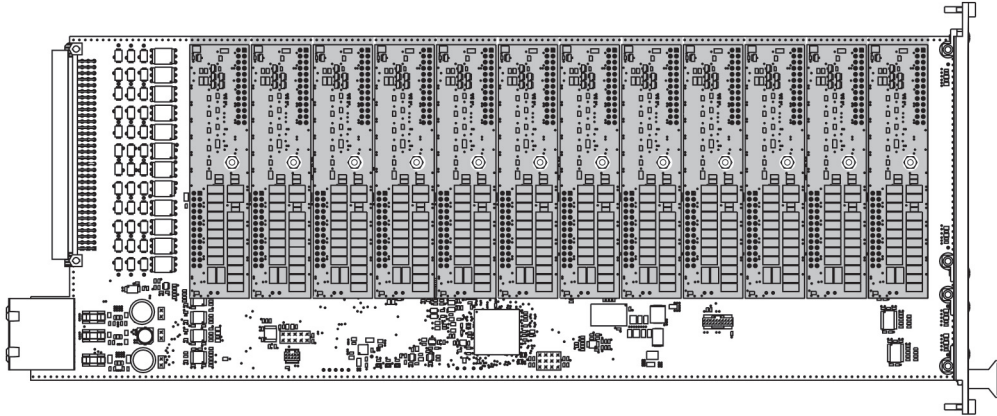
Side View of the ES5385.1 Carrier Board for Resistor Cascade with Twelve Assembled PB5385RES.1-A Resistor Cascade Piggybacks
